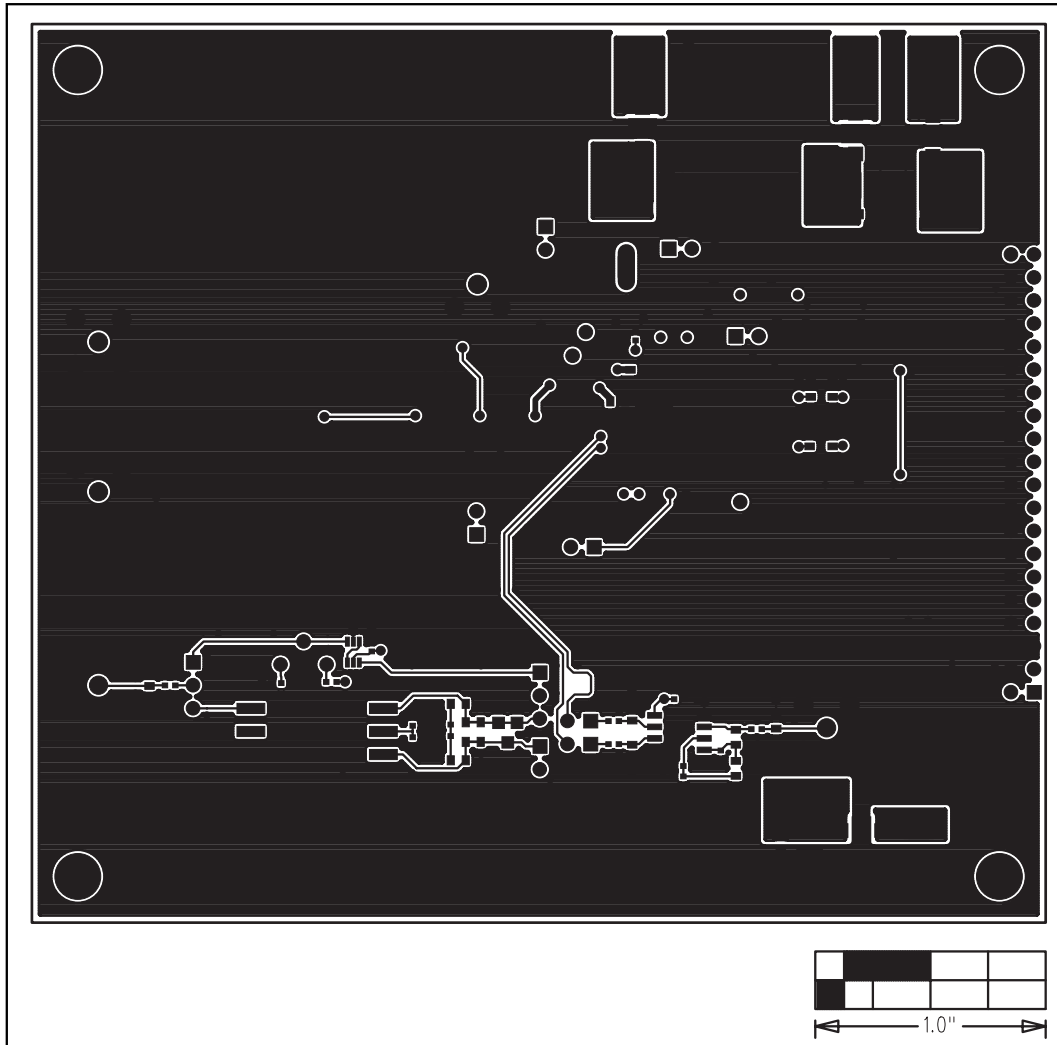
MAX1211 EV Kit PC Board Layout—Solder Side
